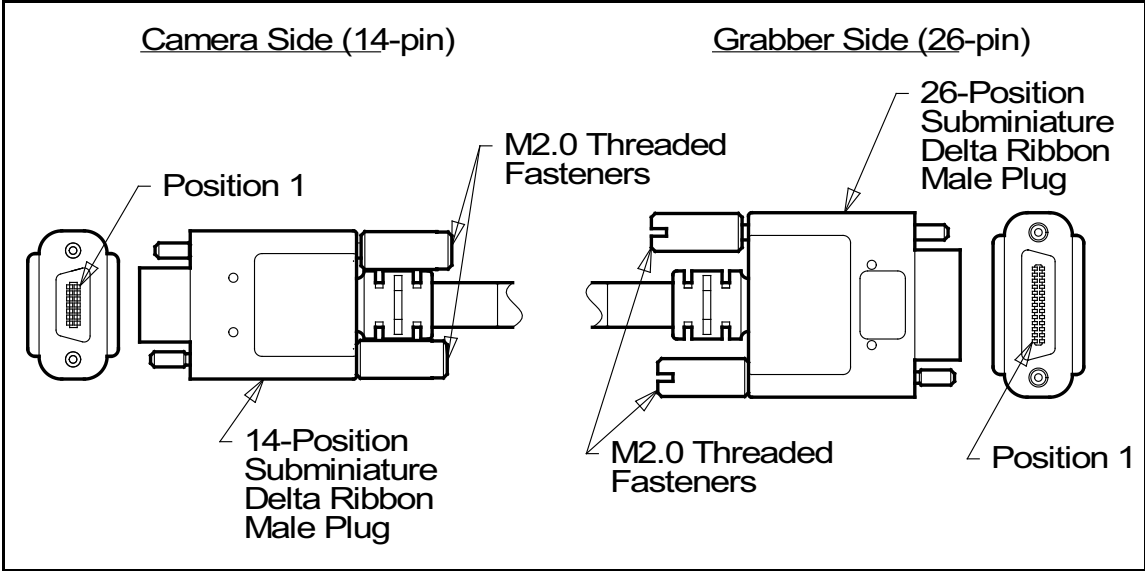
PoCL-Lite Configuration Cable Assembly (26pin-14pin)
